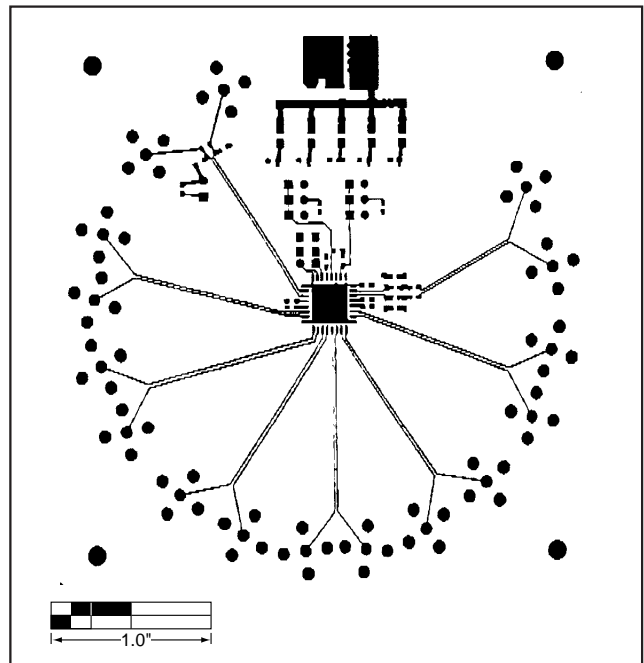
MAX3693 EV Kit PC Board Layout—Component Side
